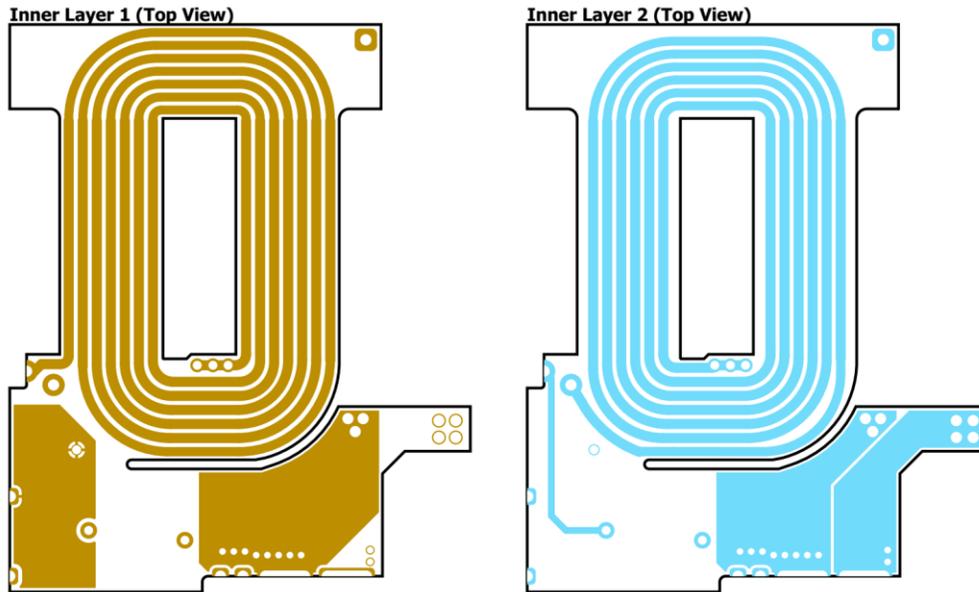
SR FET, Bias Supply, and Primary-Side Winding PCB, Inner Layers.
